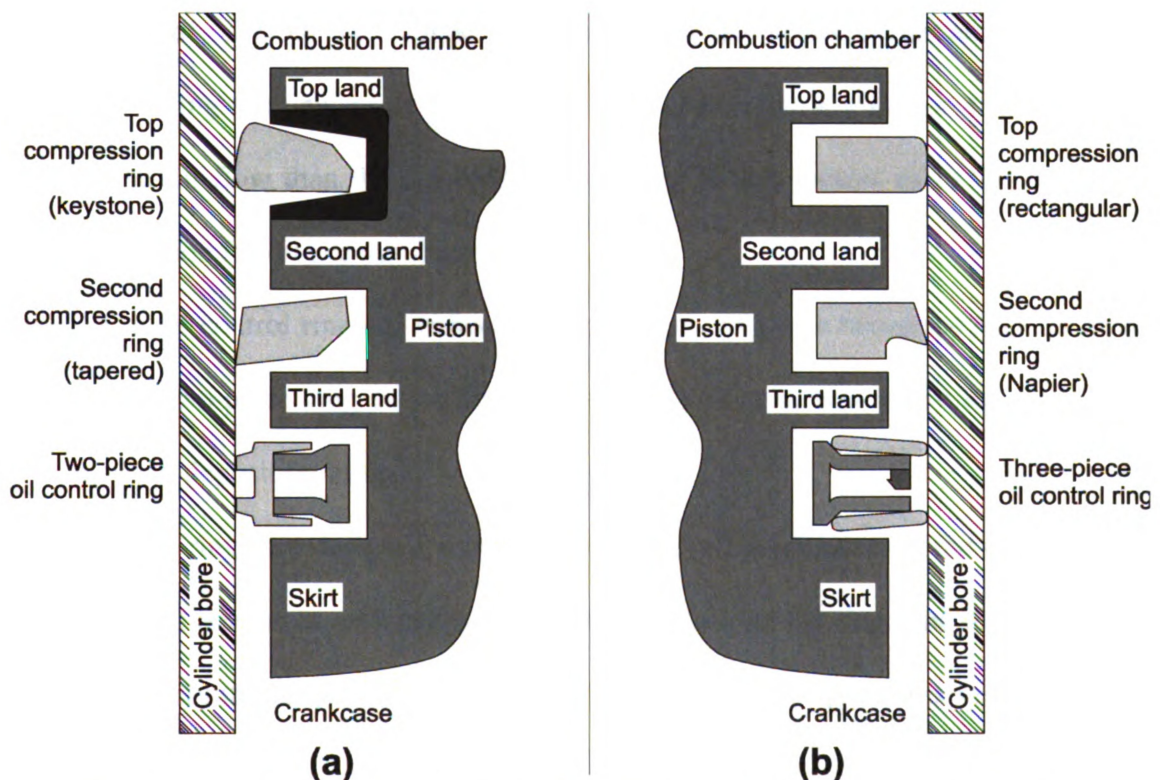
A typical ring-pack (a) diesel engine and (b) gasoline engine
